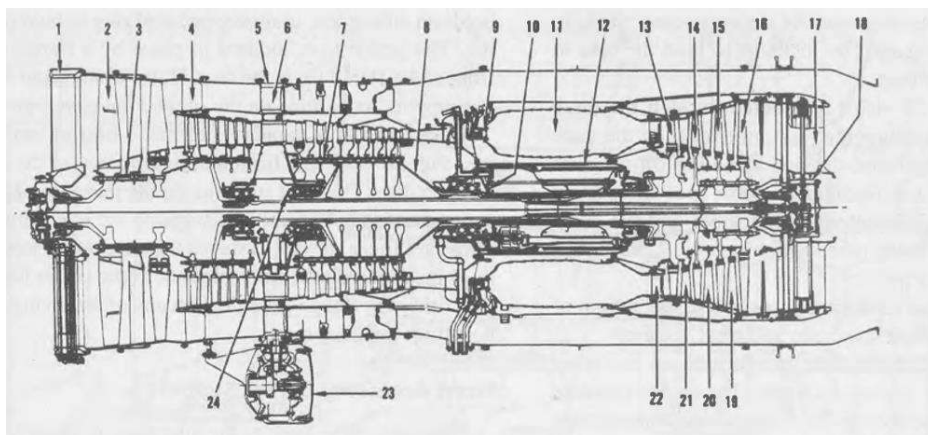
Pratt & Whitney JT8D Low-Bypass Turbofan Cross Section [33]
